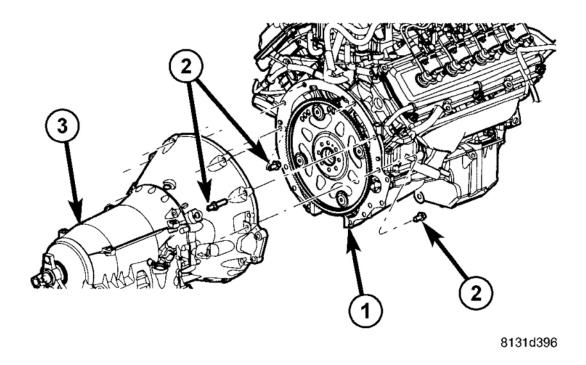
Remove/Install Transmission to Engine Bolts Courtesy of CHRYSLER LLC
